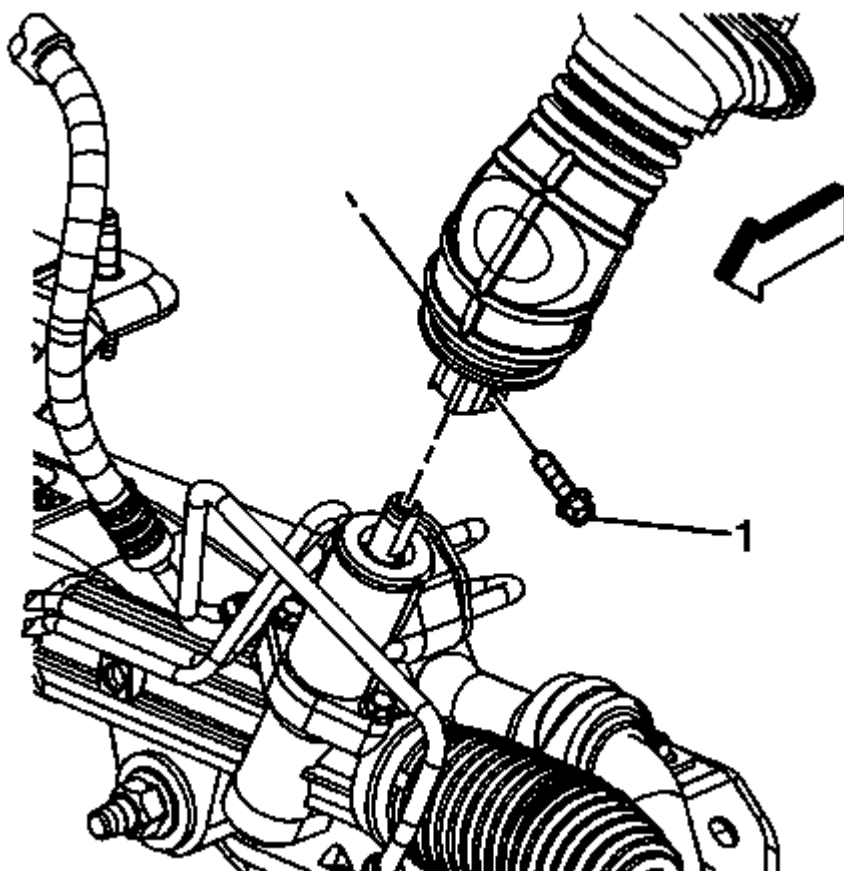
Identifying Intermediate Steering Shaft Bolt
